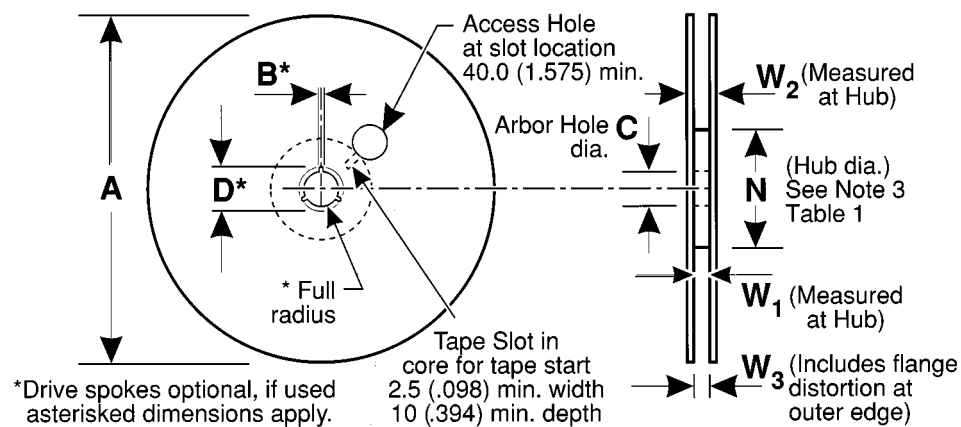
Reel Dimensions (Metric Dimensions will govern)
